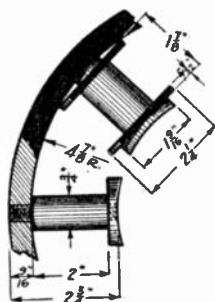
(Below) One of the pole pieces, and (above) one carrying a wooden bobbin of the field or stator of the multi-polar dynamo.
